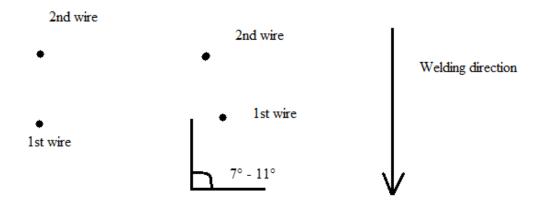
Alignment of wires in tandem welding torch as seen from top when welding direction is shown with arrow.
